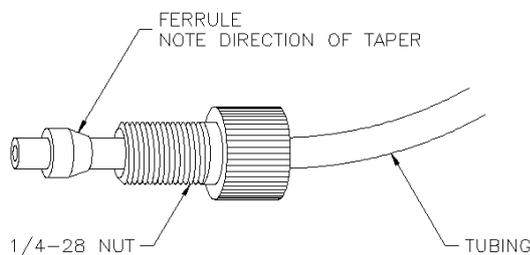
Assembly of 1/4-28 nut, ferrule and tubing for connection to degasser ports.
